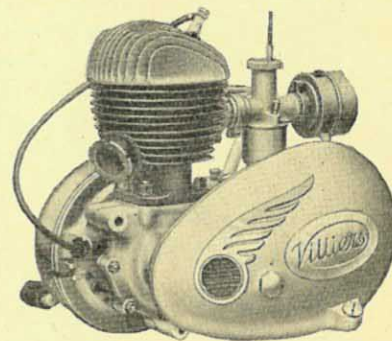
MARK 10D ENGINE-GEAR UNIT.
